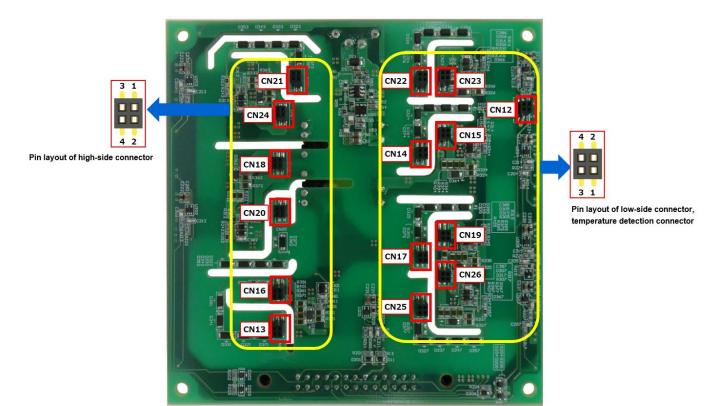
Layout of Power Module Connectors (on Back Side of the Board)
